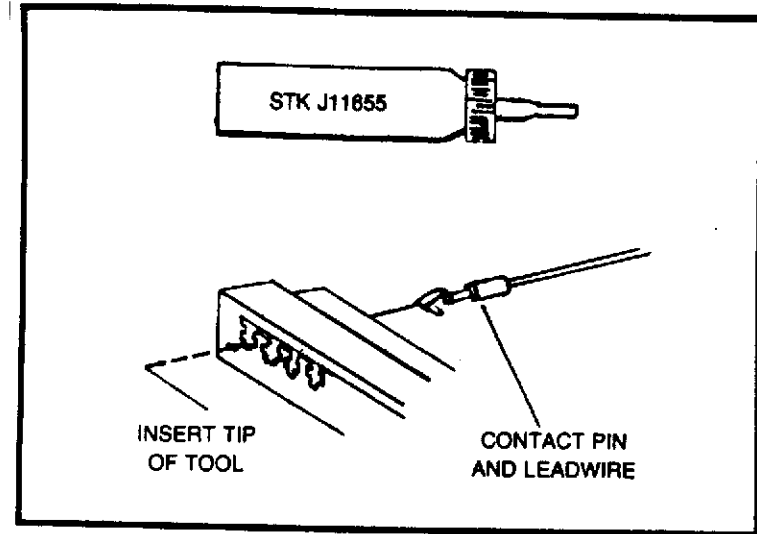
Contact pin removal tool STK 11855 (Courtesy Bell & Howell)
